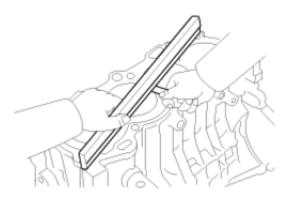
Inspecting Top Surface Of Cylinder Block For Flatness Courtesy of HYUNDAI MOTOR CO.
